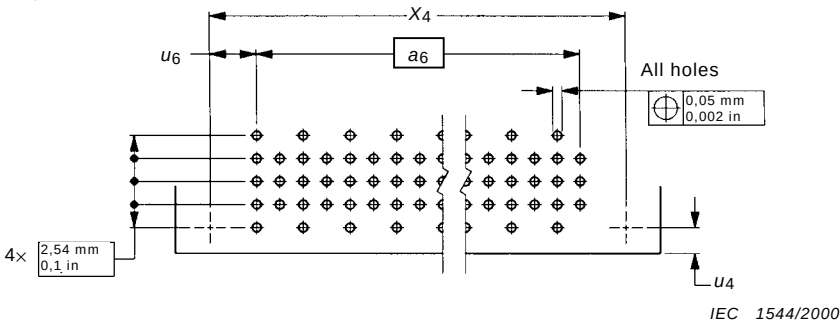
Hole pattern on printed boards for styles B, C, D, E, Q, R, S, T and W
